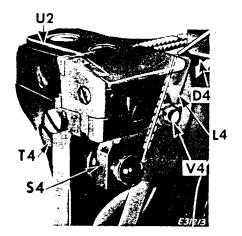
(Machine 246K44) Removal and Replacement of Stationary Knife
